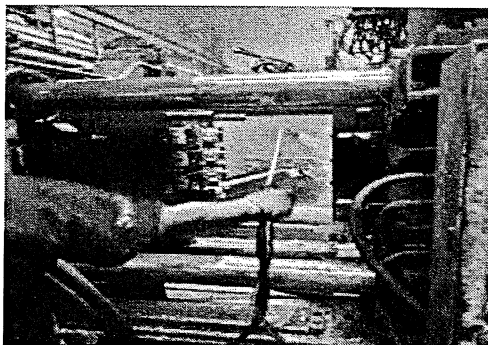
High-Pressure Aluminum Die Casting Machine and Aluminum Melting Furnace
